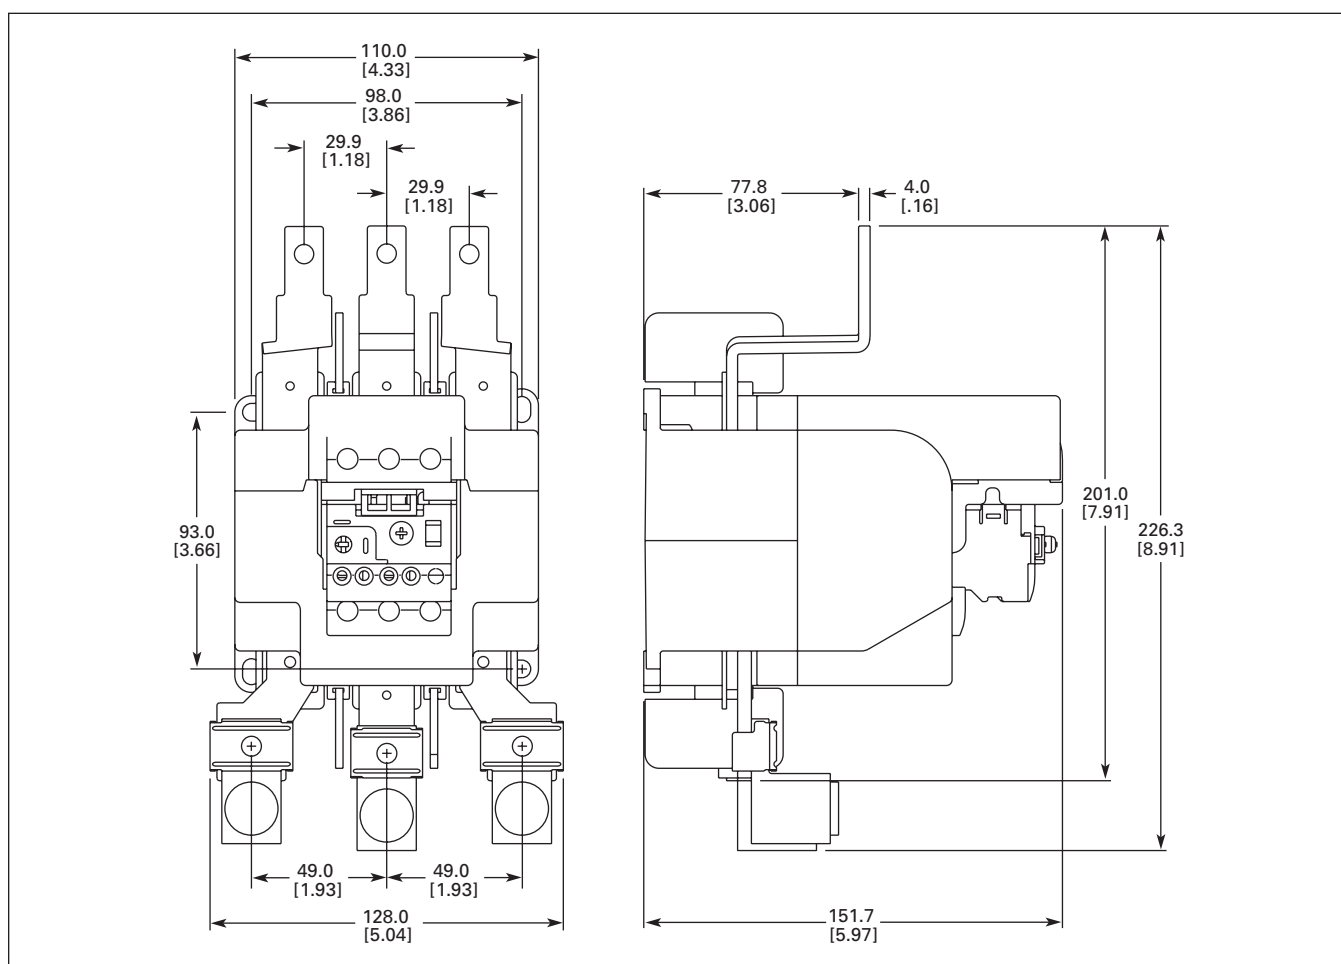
110 mm C396 (30 – 150A) + C396CBARXT Direct Connect to XT Frame G Contactor — Approximate Dimensions in mm [in]
